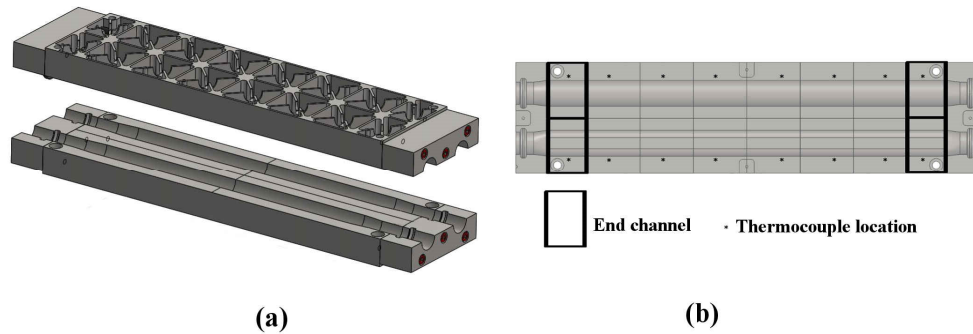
(a) Three-dimensional schematic of the RVM tool faces showing segregated channels and (b) top view of the tool face with marked thermocouple locations and end channels.
